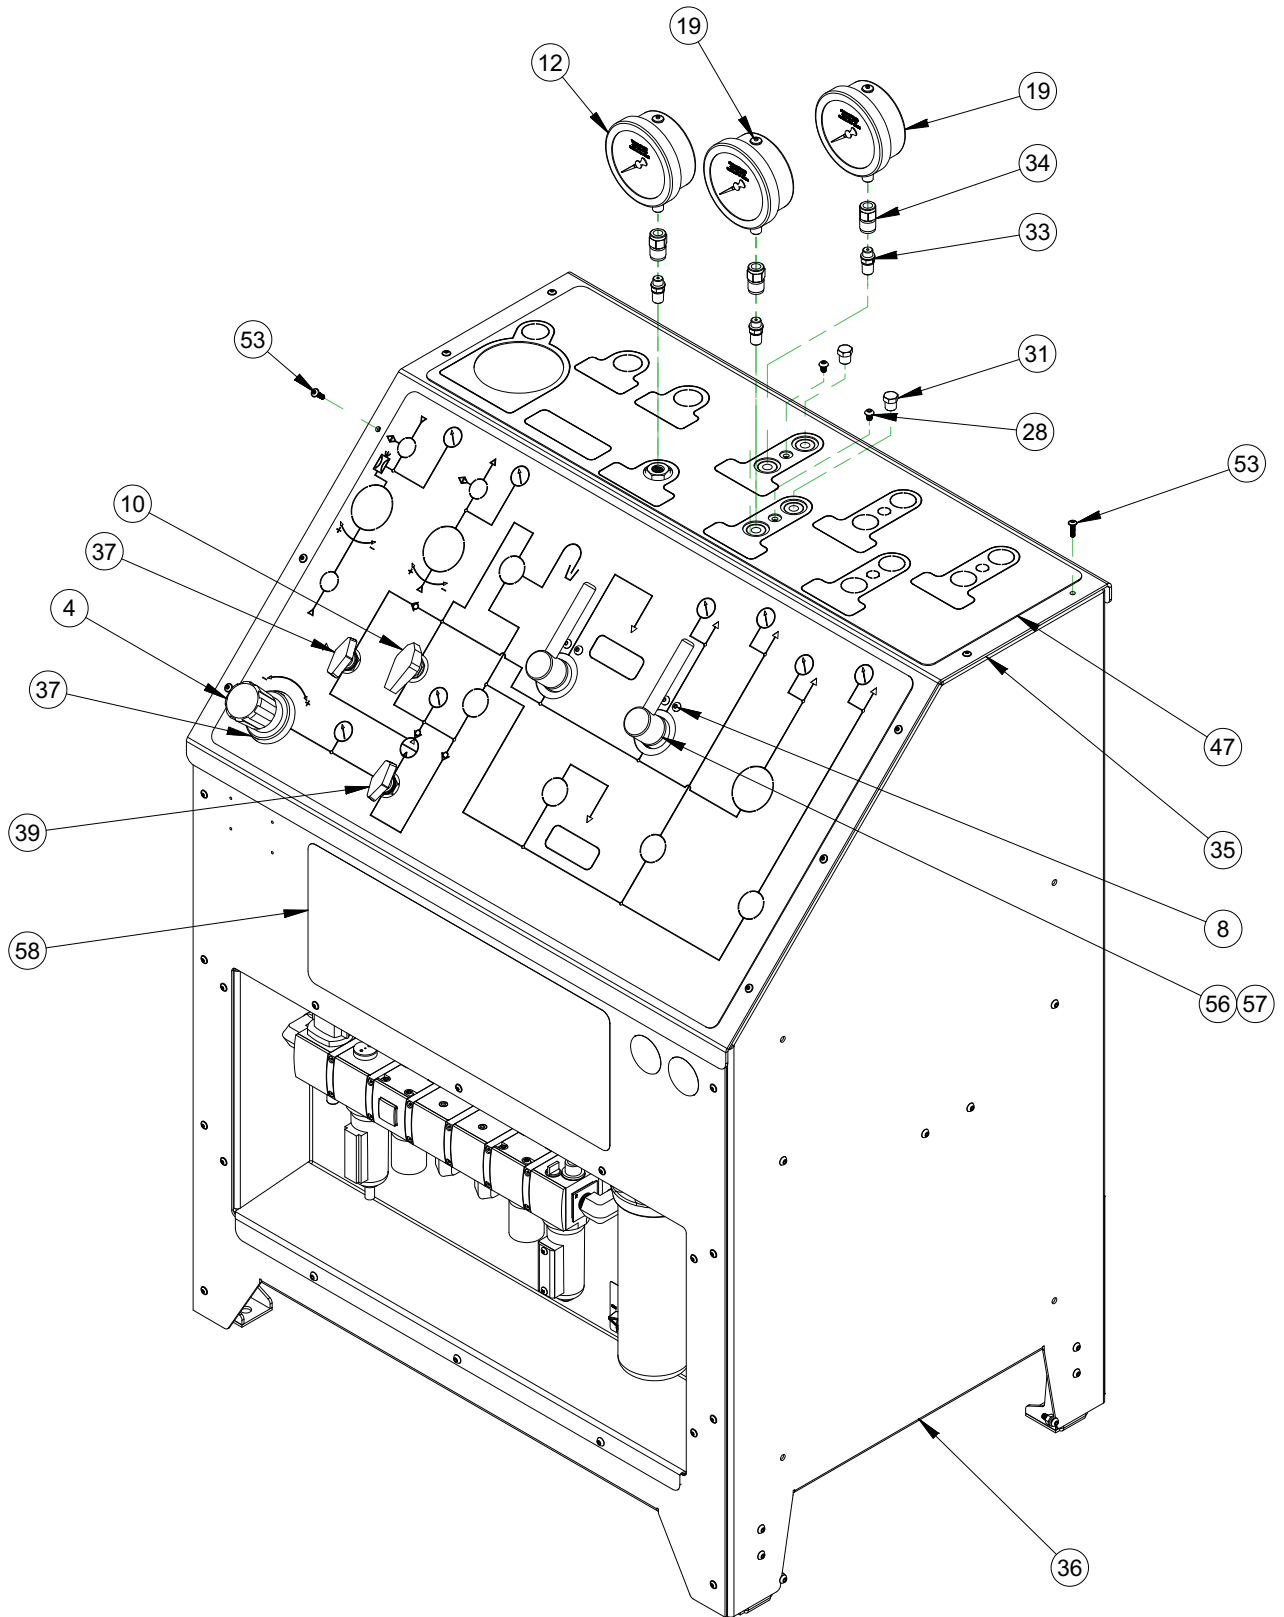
HPC-10K BASE ASSEMBLY (P/N 90354)
